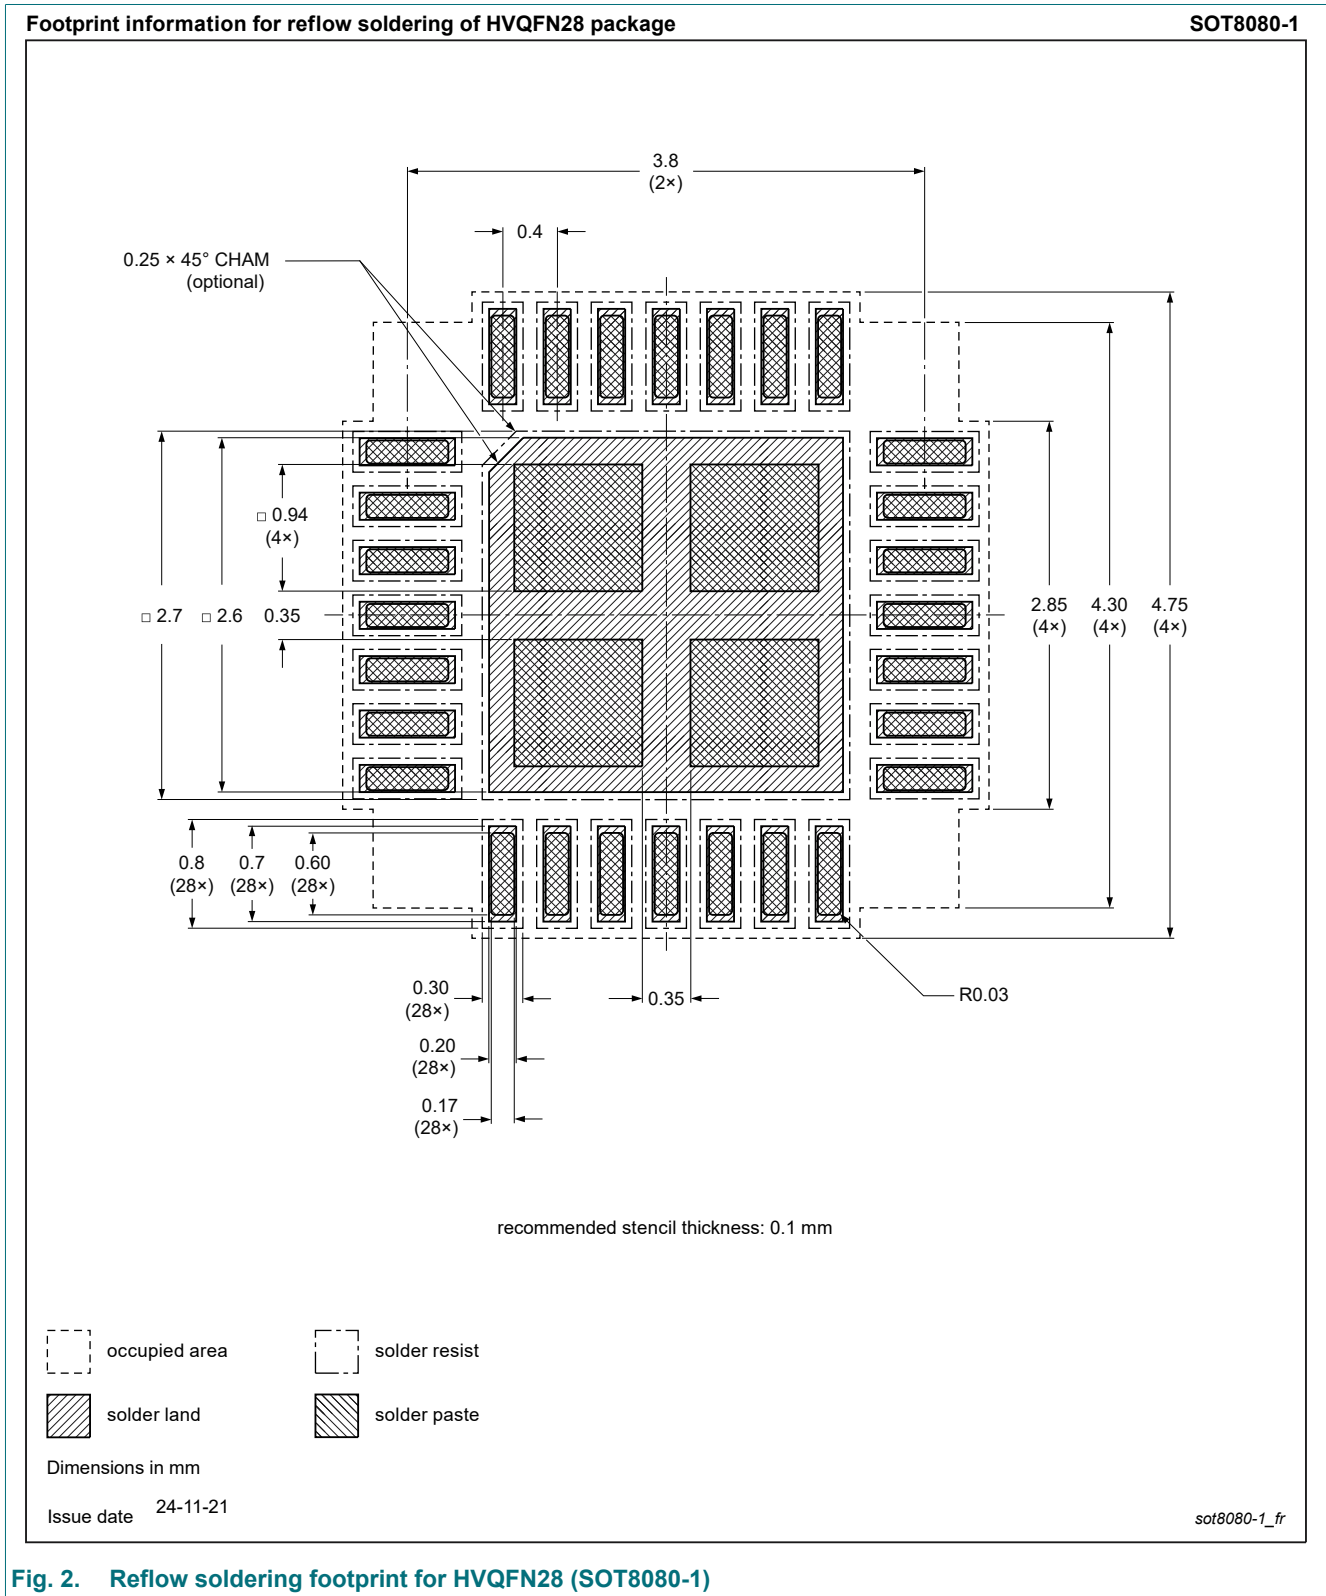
Reflow soldering footprint for HVQFN28 (SOT8080-1)
